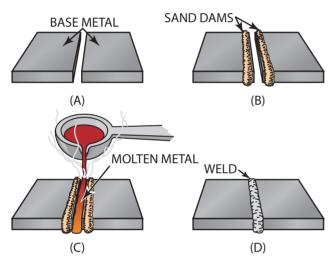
Flow welding: (A) two pieces of metal plate, (B) sand dams to hold molten metal in place, (C) molten metal poured between metal plates, and (D) finished welded plate.
